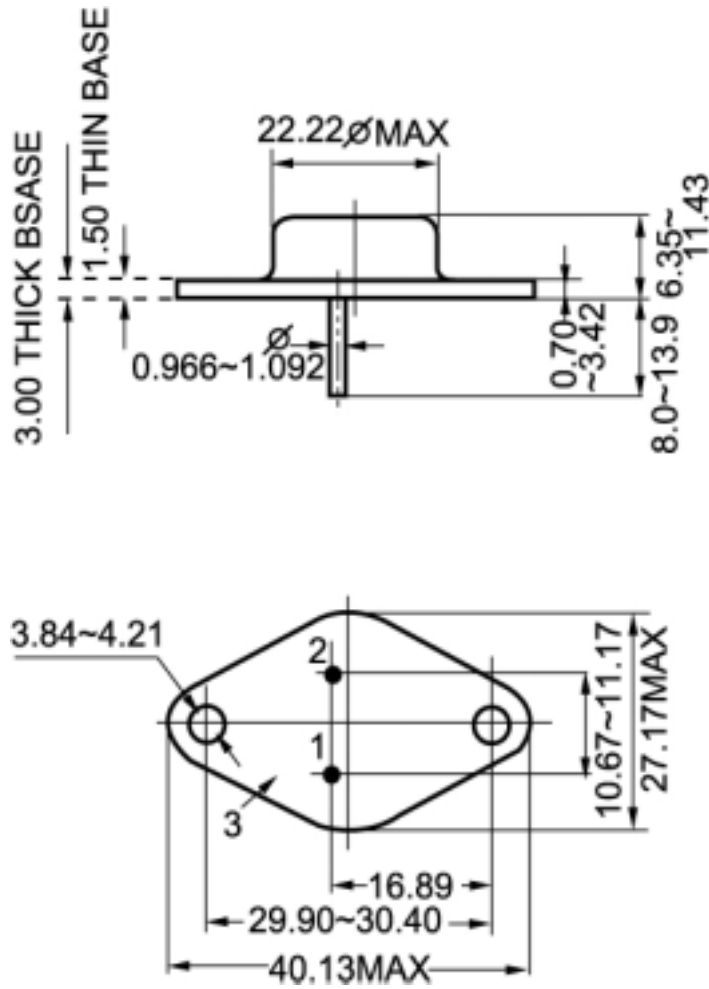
outline dimensions (unindicated tolerance:  $\pm 0.1$ mm)
